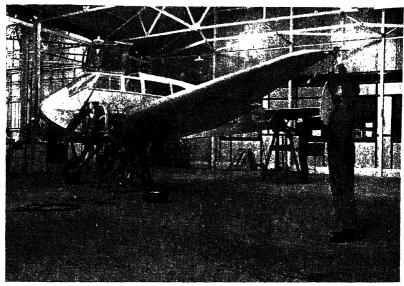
Check rigging dimensions (4). Taking diagonal measurements. Wing tip to centre line of rear fuselage.
